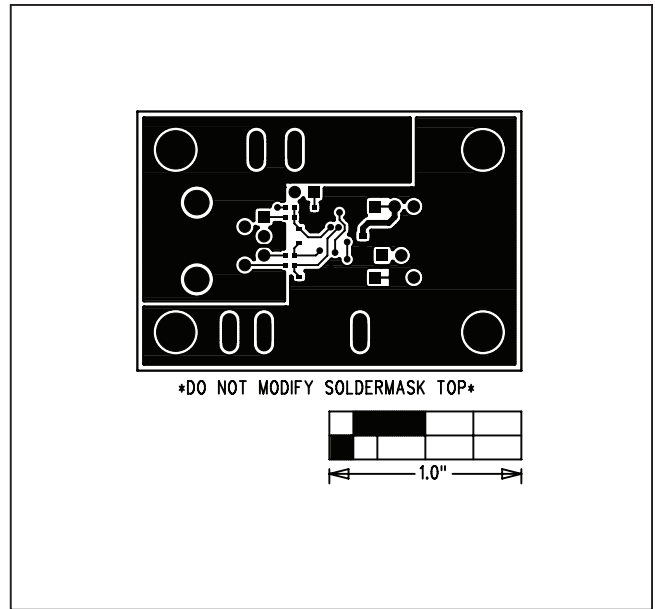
MAX17050 EV Kit PCB Layout—Solder Side
